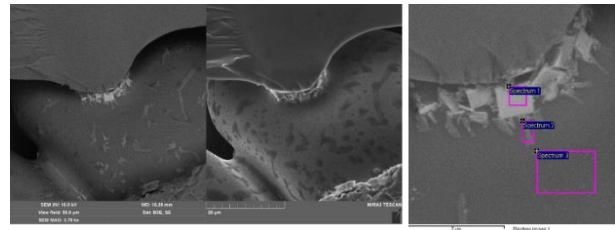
Electronic image of the fracture of the samples of welded joints of AA7056 made by FBW (visible field 10 mm)
